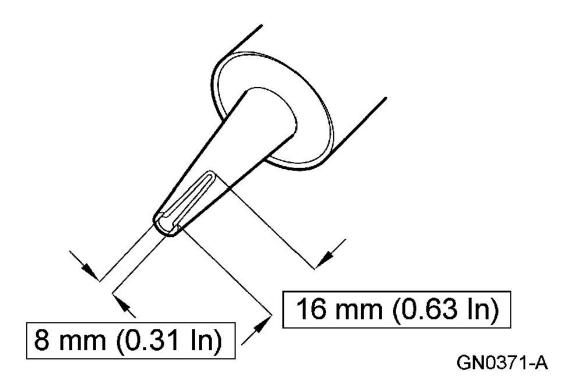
Cutting Urethane Adhesive Applicator Tip To Specification Courtesy of FORD MOTOR CO.
